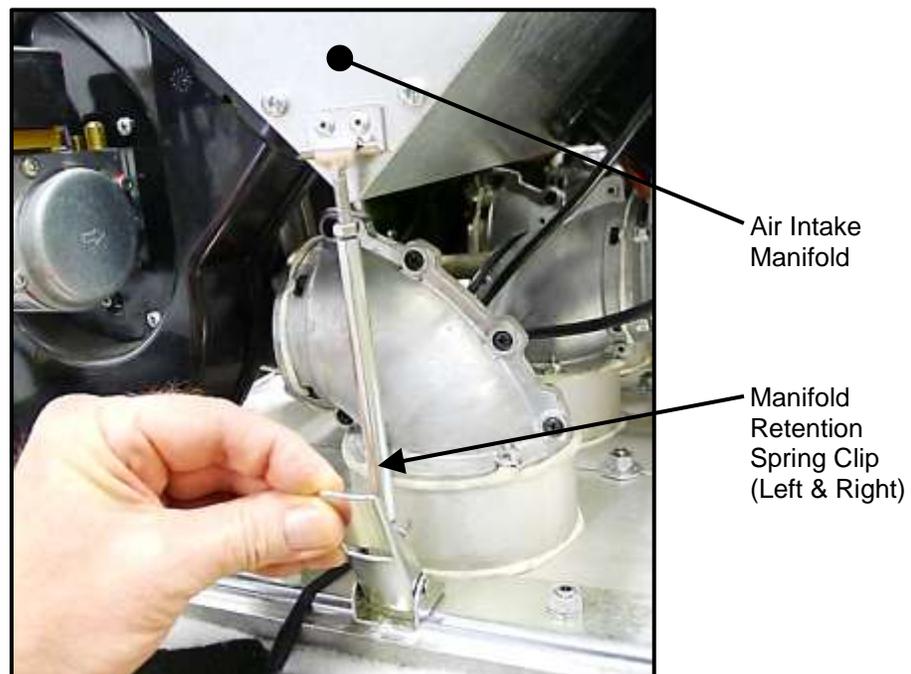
Unlatch Spring Clips from Left and Right Side of Manifold (Step 5)
